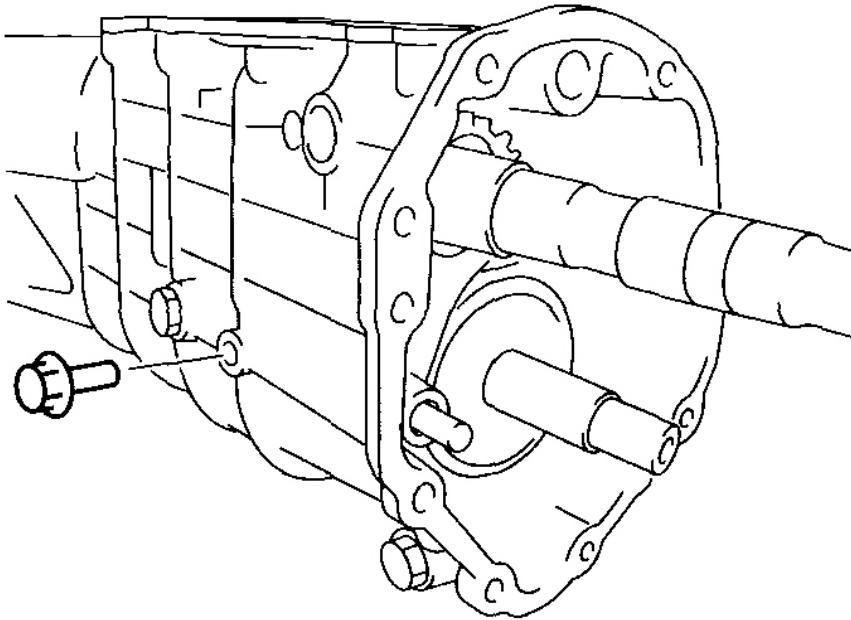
Assembling 3rd Counter Gear Component, 3rd/4th Clutch Hub Component & 3rd/4th Shift Fork Component
